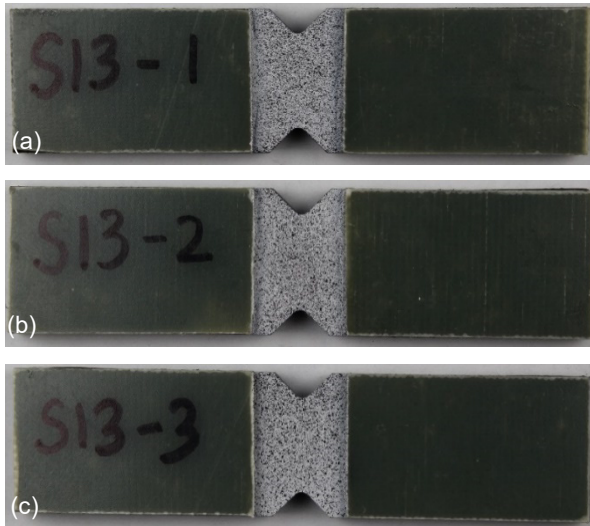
1-3 plane shear specimens prior to testing. (a) TSFC_S13-1. (b) TSFC_S13-2. (c) TSFC_S13-3.
